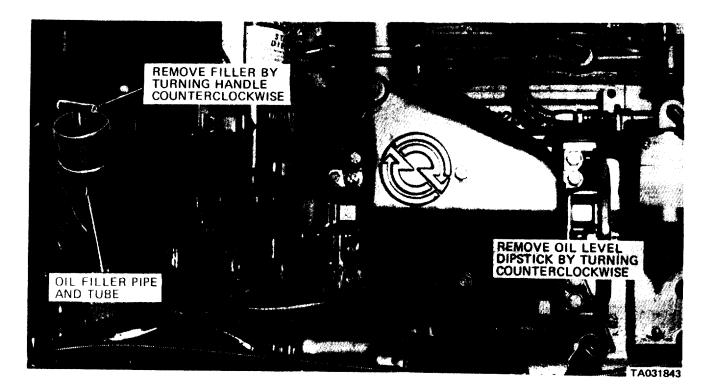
Oil level dipstick and oil filler pipe and cap, removal and installation.
